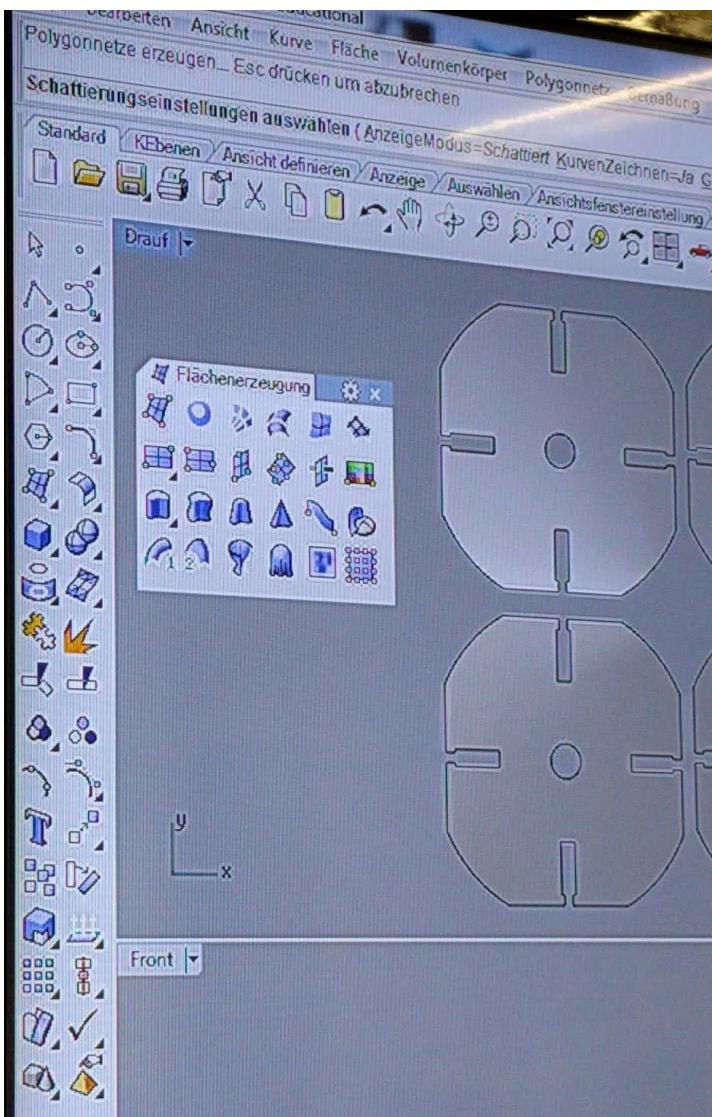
Construct 3D structure out of a 2D design in Rhino
